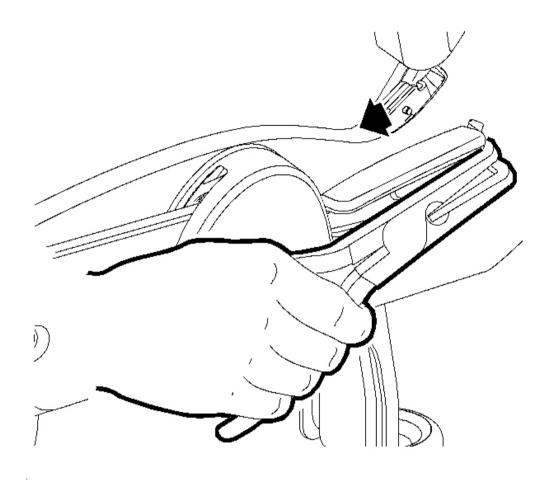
Recliner Handle Trim & Side Trim Cover Courtesy of GENERAL MOTORS CORP.
